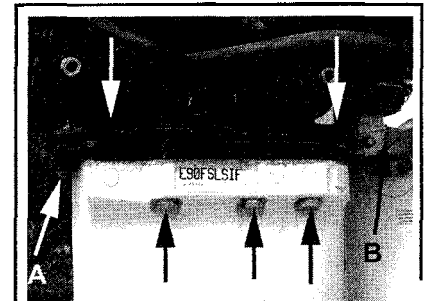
Starboard powerhead fasteners- (A) is actually on port side and (B) is horizontal
